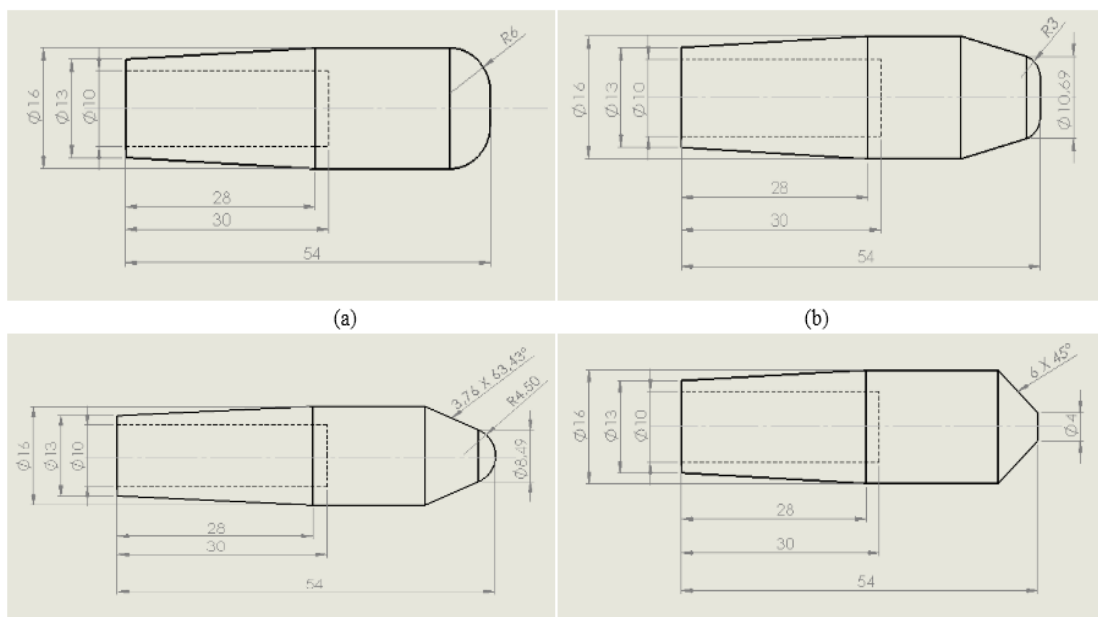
Technical drawings of electrode tip types a) Flat R6 b) Conical R3 c) Conical round d) Flat conical
